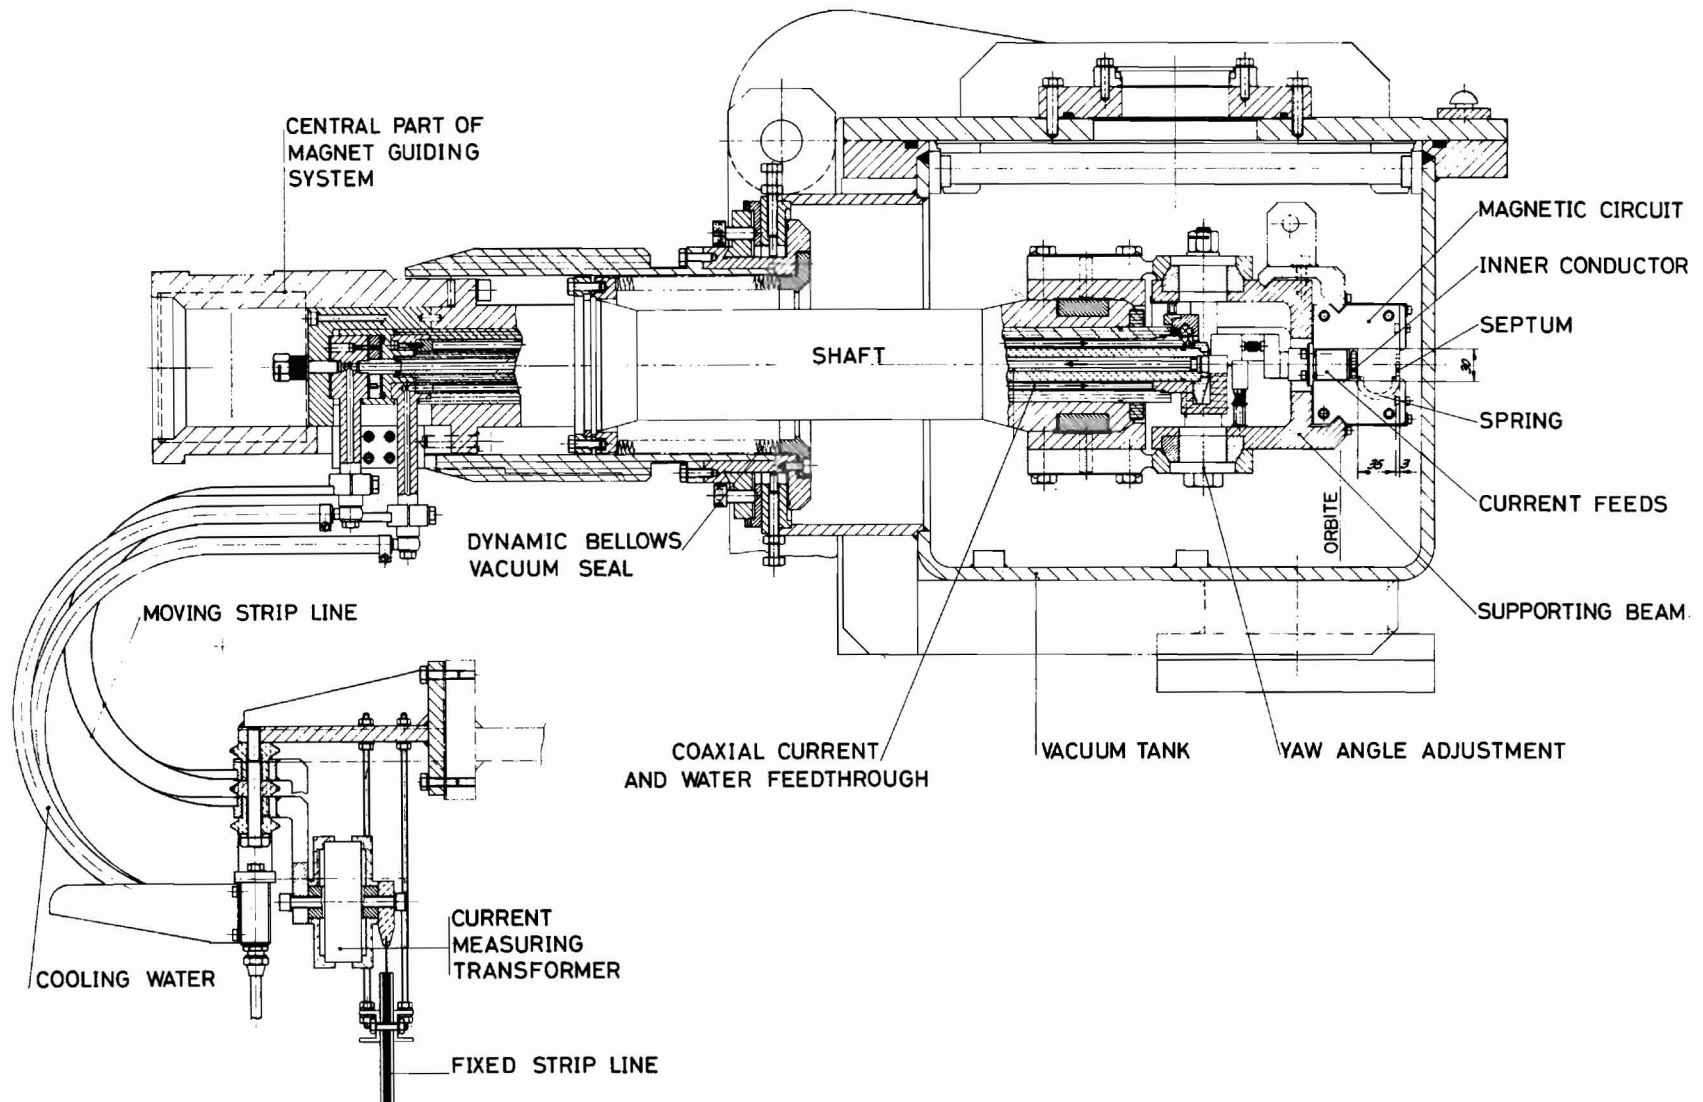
Sectional drawing of the mobile septum magnet. Carriage and hydraulic actuator are not shown.
